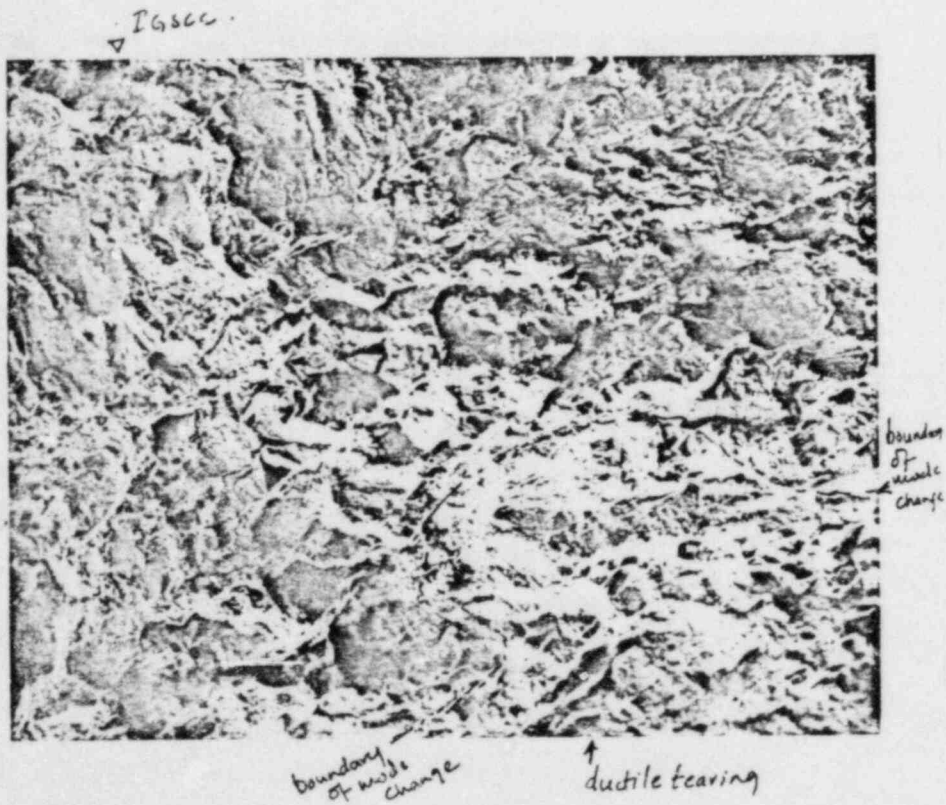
SEM Fractograph - Division I Broken Bolt Head
